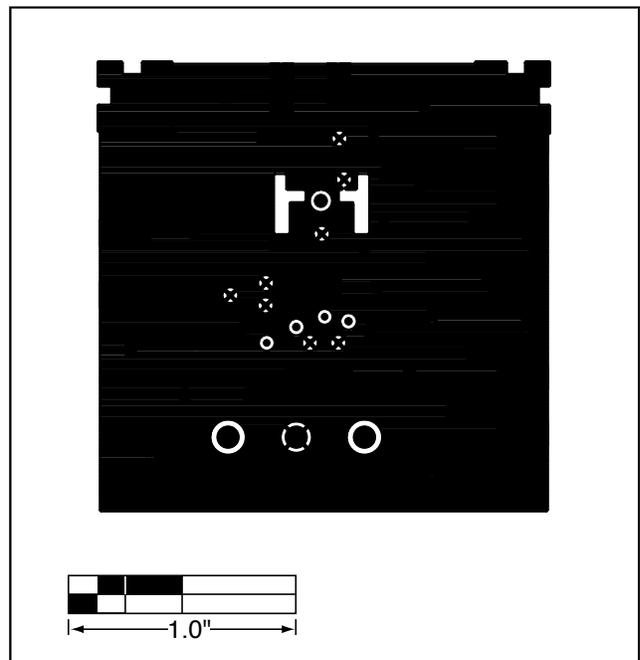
MAX9982 EV Kit PC Board Layout—Inner Layer 2 (GND)
